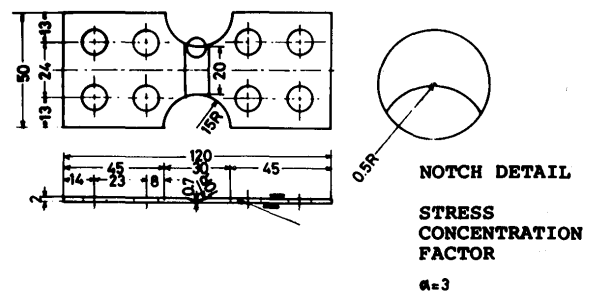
Size and geometry of the specimen used in load-controlled tests
